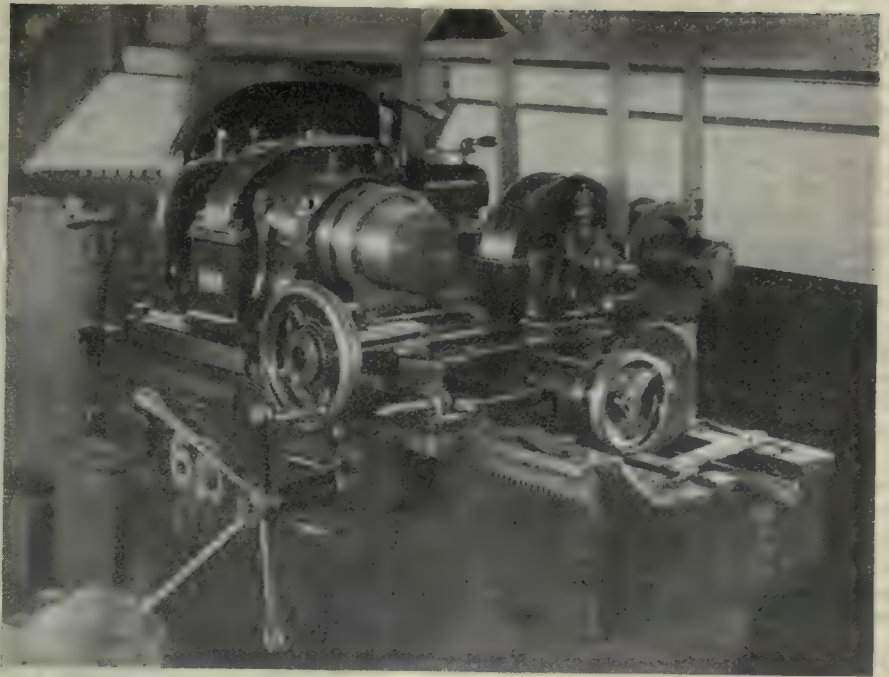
MILLING ADAPTER THREADS ON LEES-BRADNER MACHINES.
